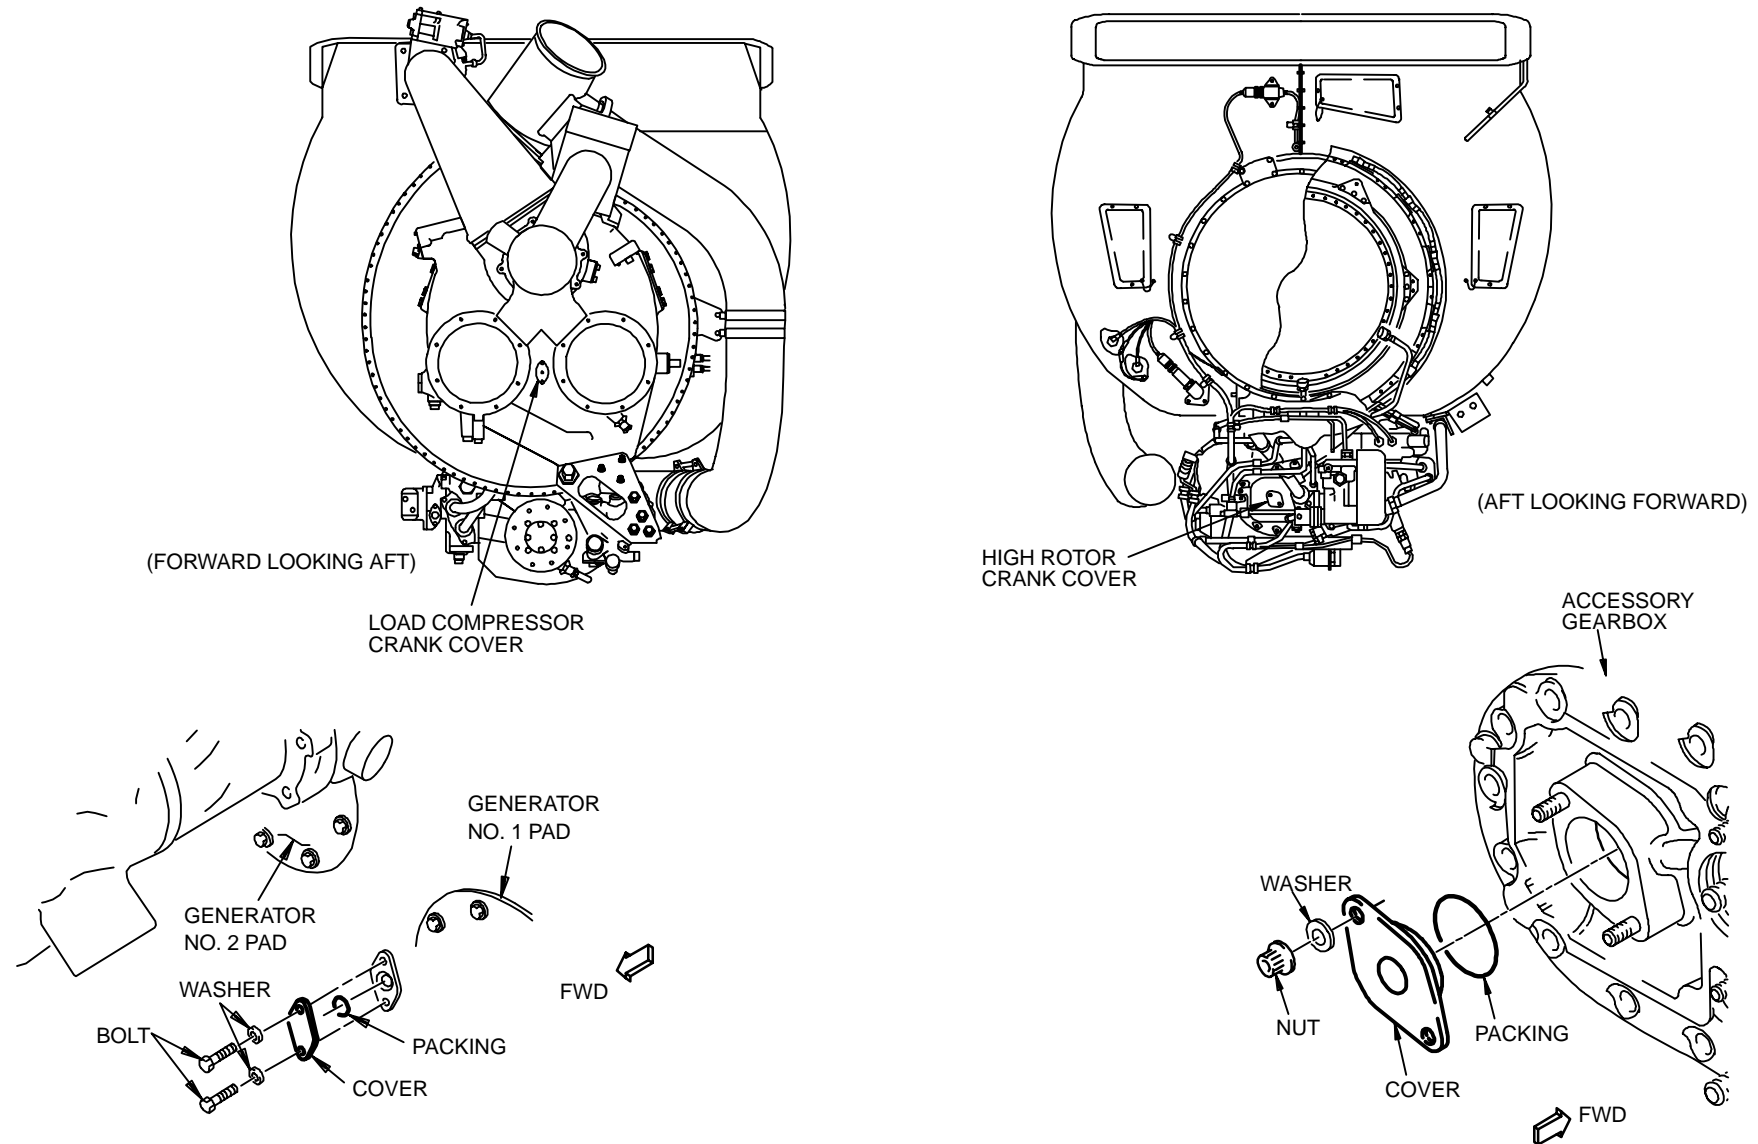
LOAD COMPRESSOR AND HIGH ROTOR CRANK COVERS
